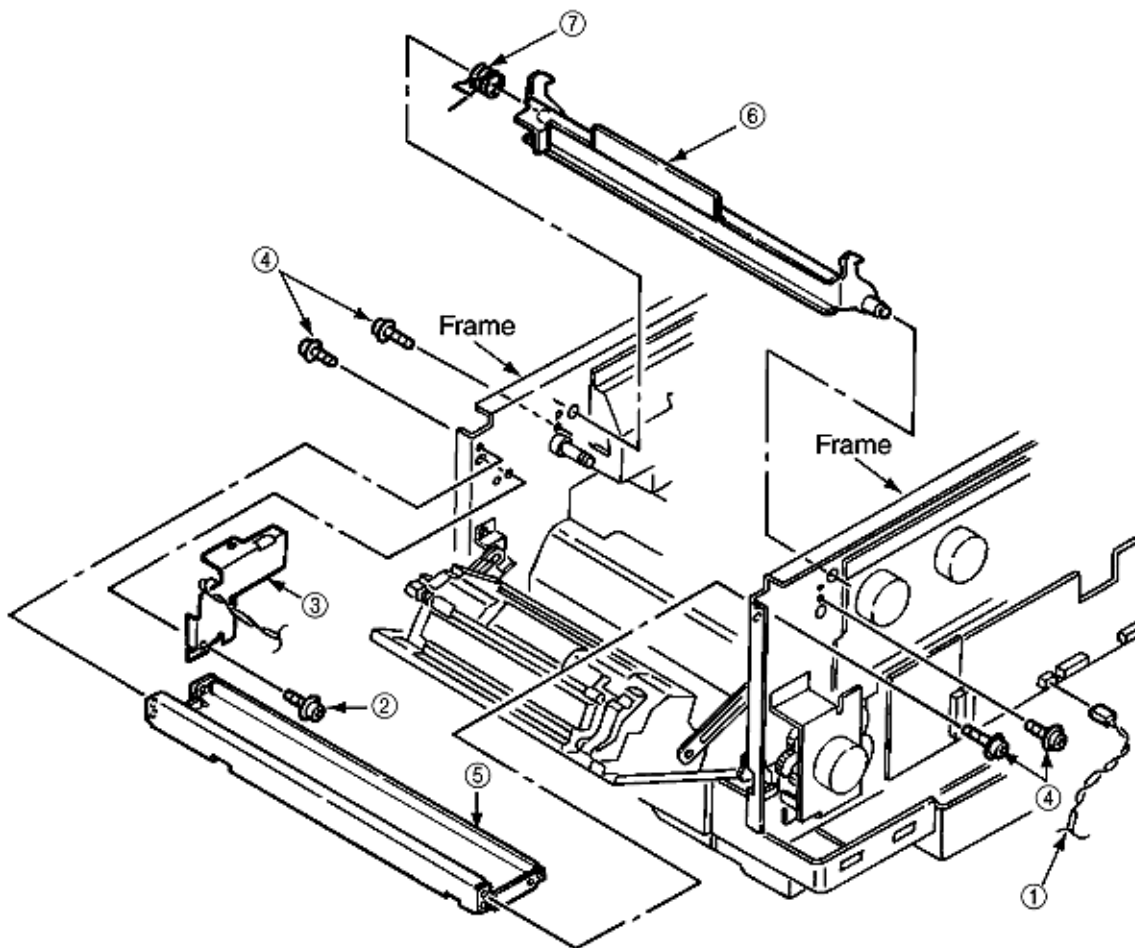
Plate Latch Lever (FD), Spring Latch Lever (FD)
